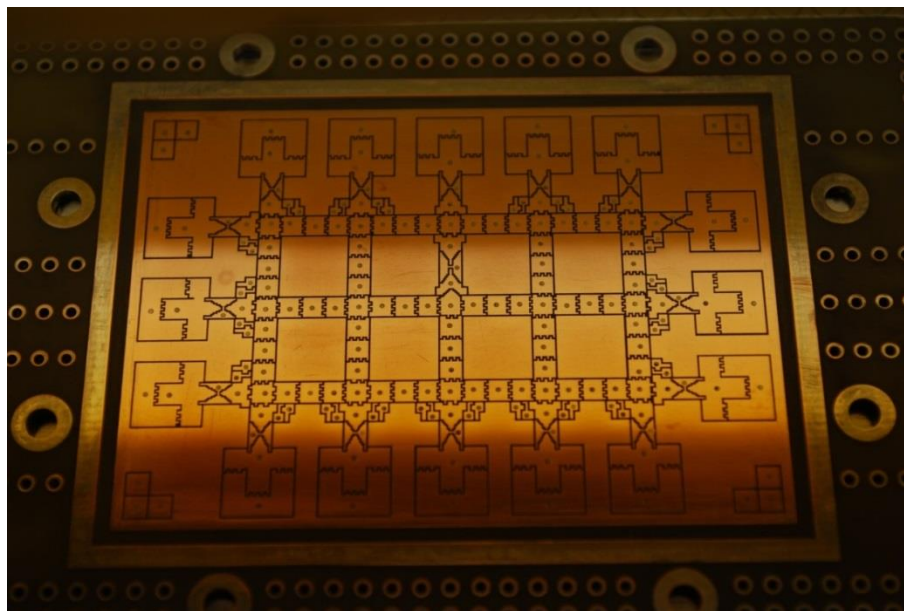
Schematic top view of the PCB based EWOD plate after filling Via holes and polishing the surface of the PCB substrate
